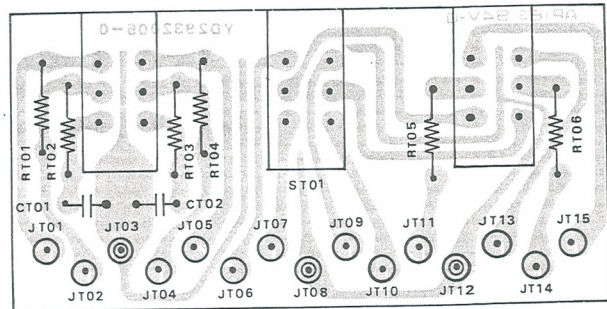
Tape Monitor and High Filter Assembly PT00 Component Locations
